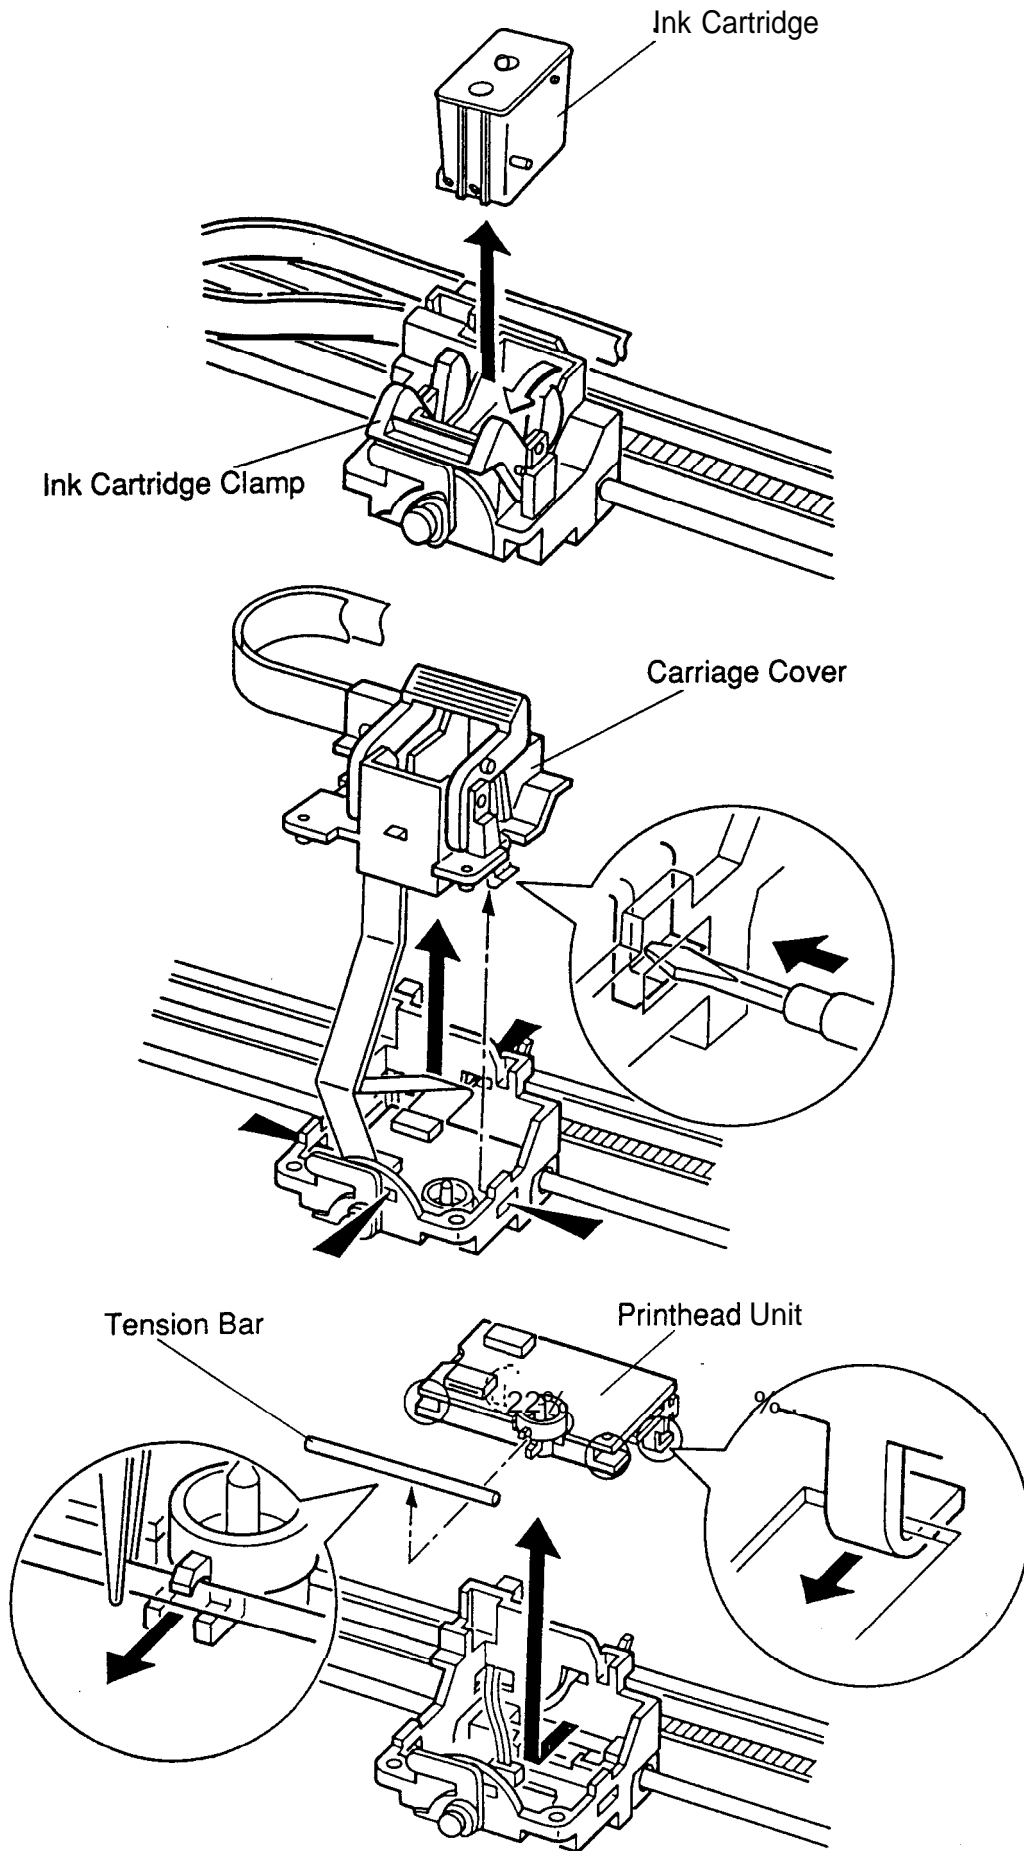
PRINTHEAD UNIT Removal (Continued)
